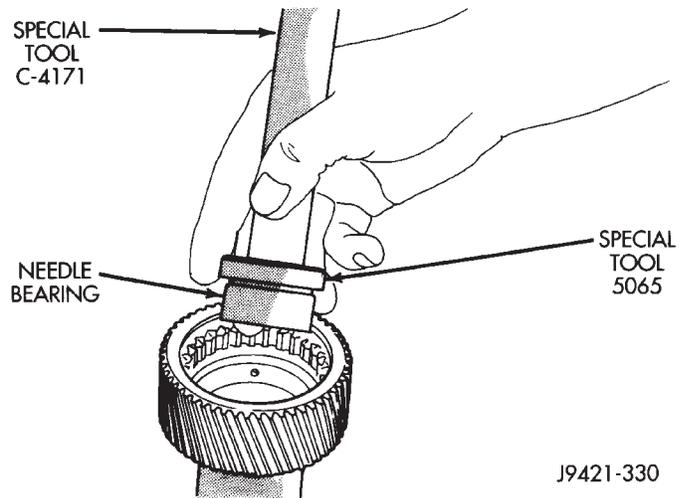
Installing Mainshaft Pilot Bearing In Input Gear
